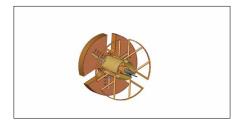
KOMBITRAK 800 T (Part No. 85100912) with spool winding axle Spool and coil winder with dancer and mechanical brake
